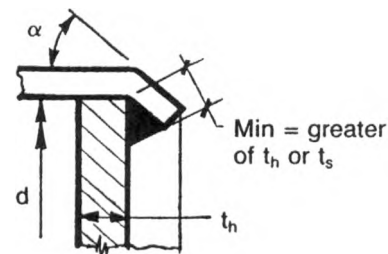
Case 12: Crimped head [1, Figure UG-34(r)].
